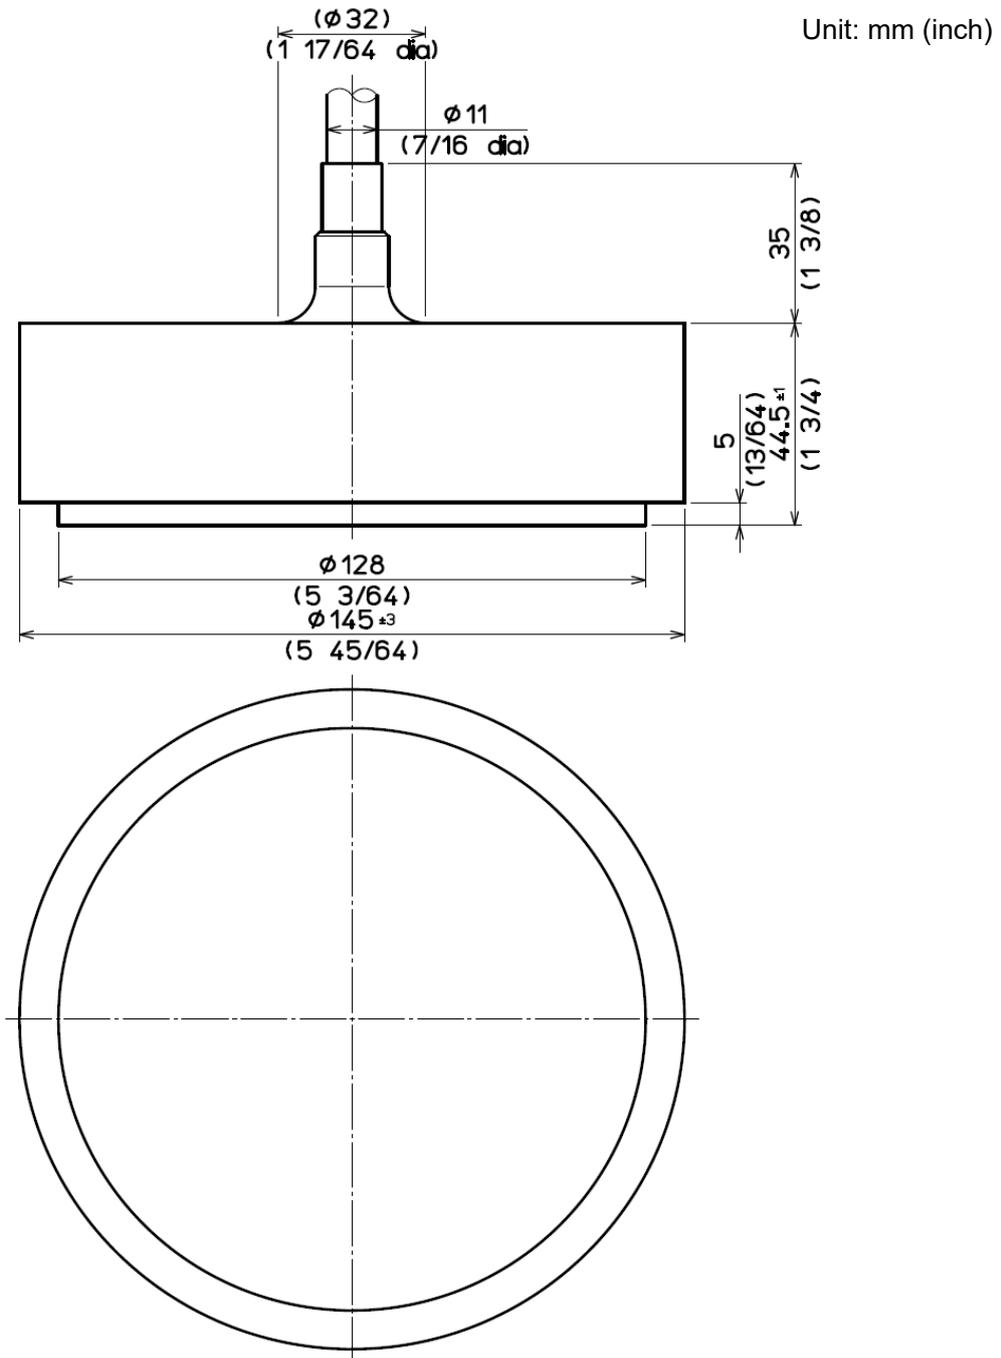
Outline dimensions of a transducer (150kHz 120φx1)
